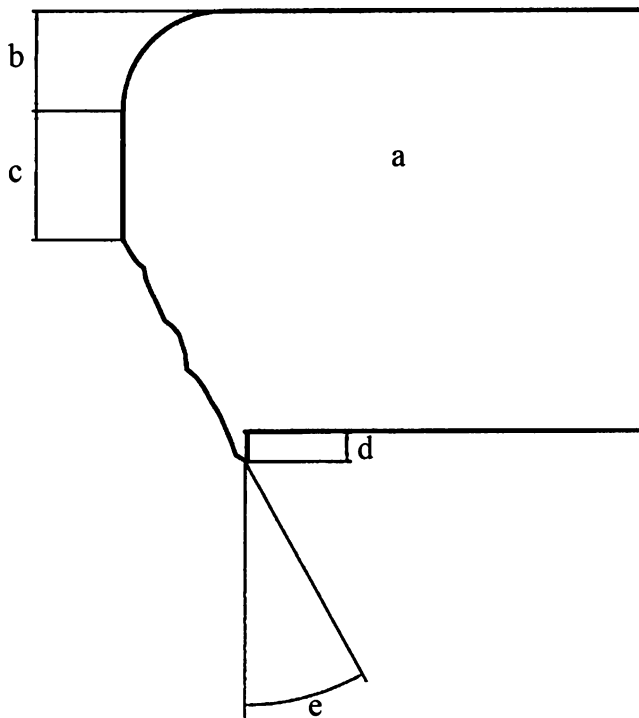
Cut sidewall characteristics that can be predicted by the five typical edge types: a. Sheet, b. Rollover depth, c. Burnish depth, d. Burr height, e. Fracture angle
